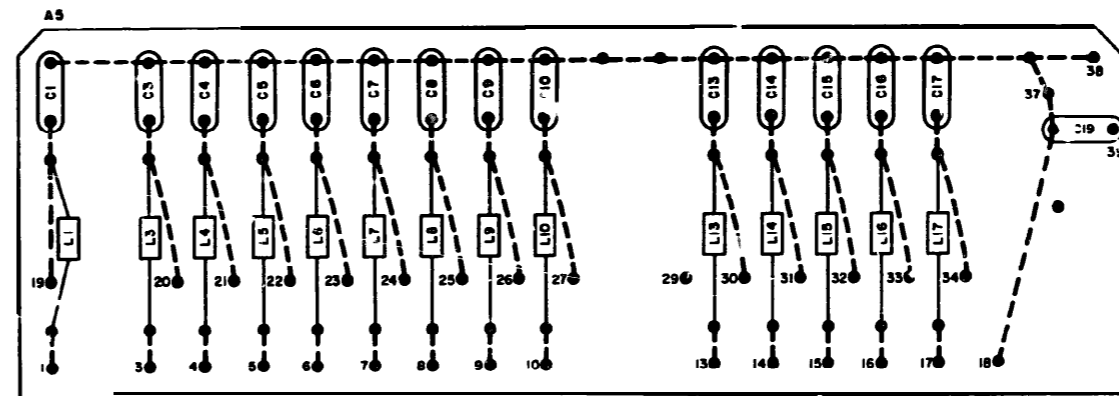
652S if unit bandpass filter assembly A3, wiring diagram and parts location
